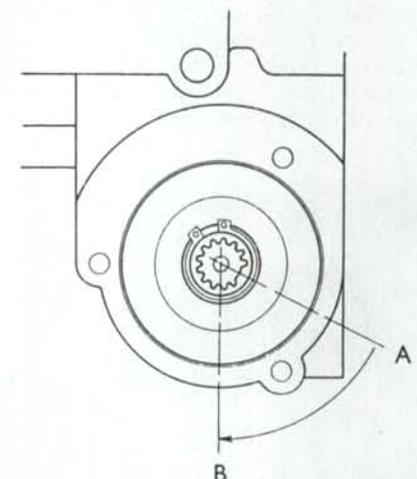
View showing "4 o'clock" position (A) and "6 o'clock" assembly position (B) used in injection pump drive gear installation on Models 1190 and 1194. Refer to text.
